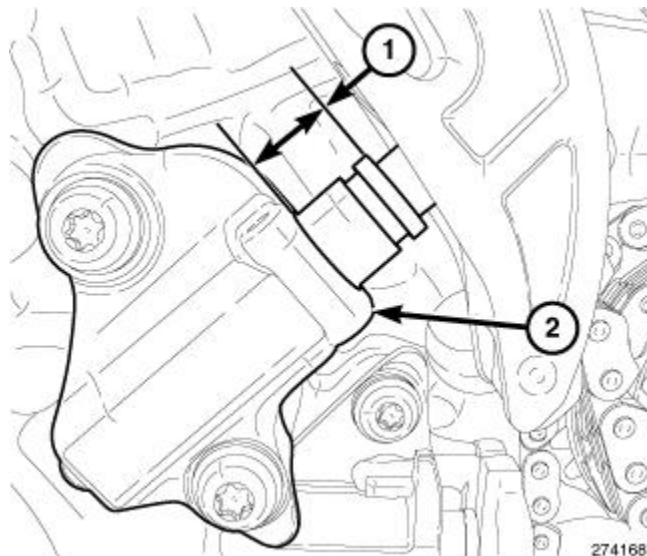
Piston Extension & Right Hand Cam Chain Tensioner
